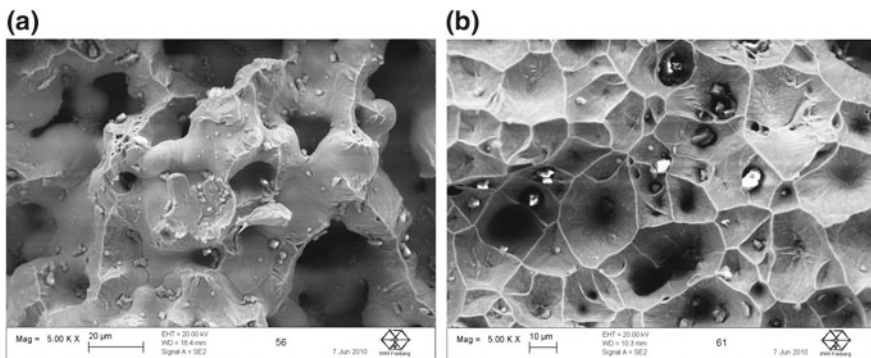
The fracture surfaces for steel samples sintered under vacuum for 2 h at sintering temperatures of 1350 °C (a) and 1400 °C (b)
